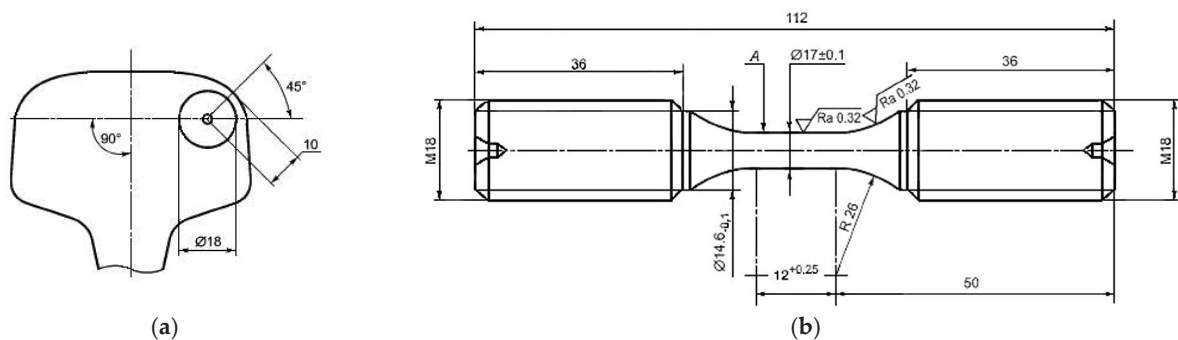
The spot where the samples for tensile testing were cut and the sample dimensions. (a)—the place where the sample was cut from the rail, (b)—test specimen drawing.
